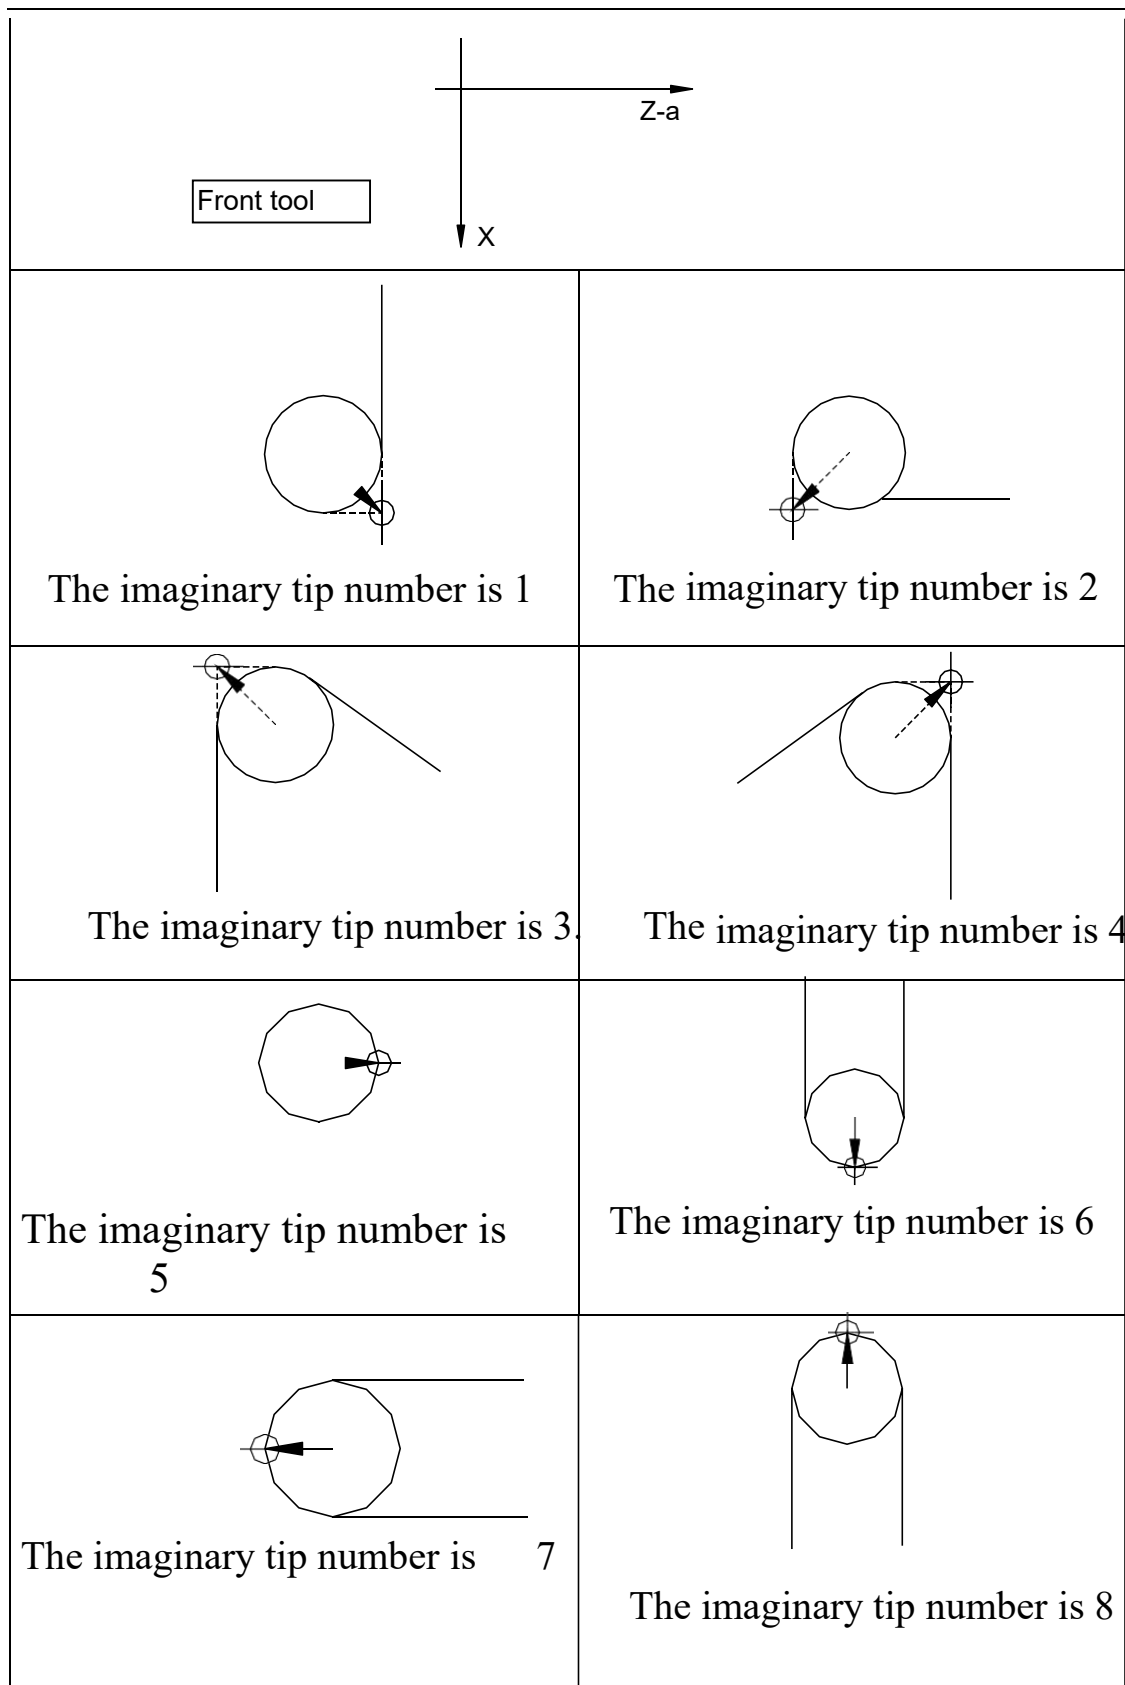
Imaginary tool tip number in front tool holder coordinate system
